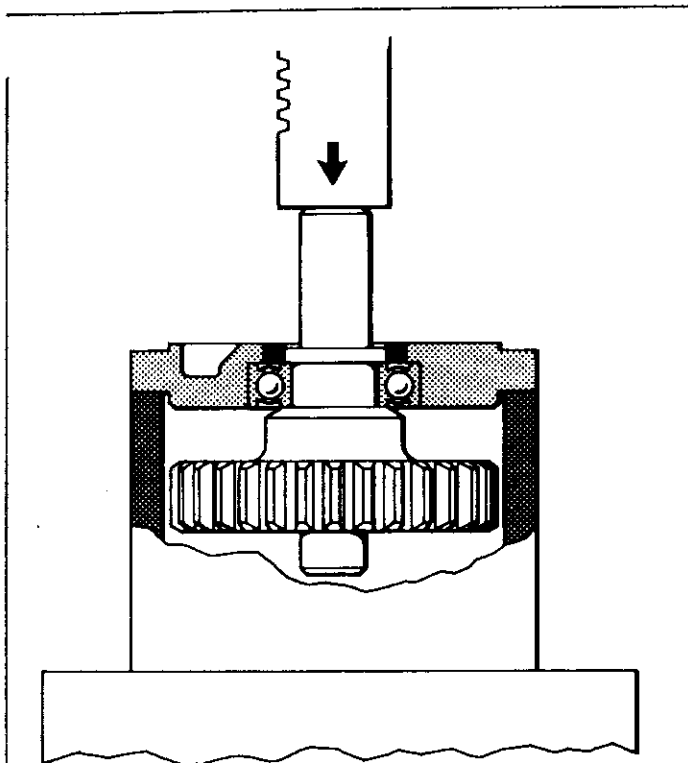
Pressing Drive Shaft, Gear, and Bearing from Cover
